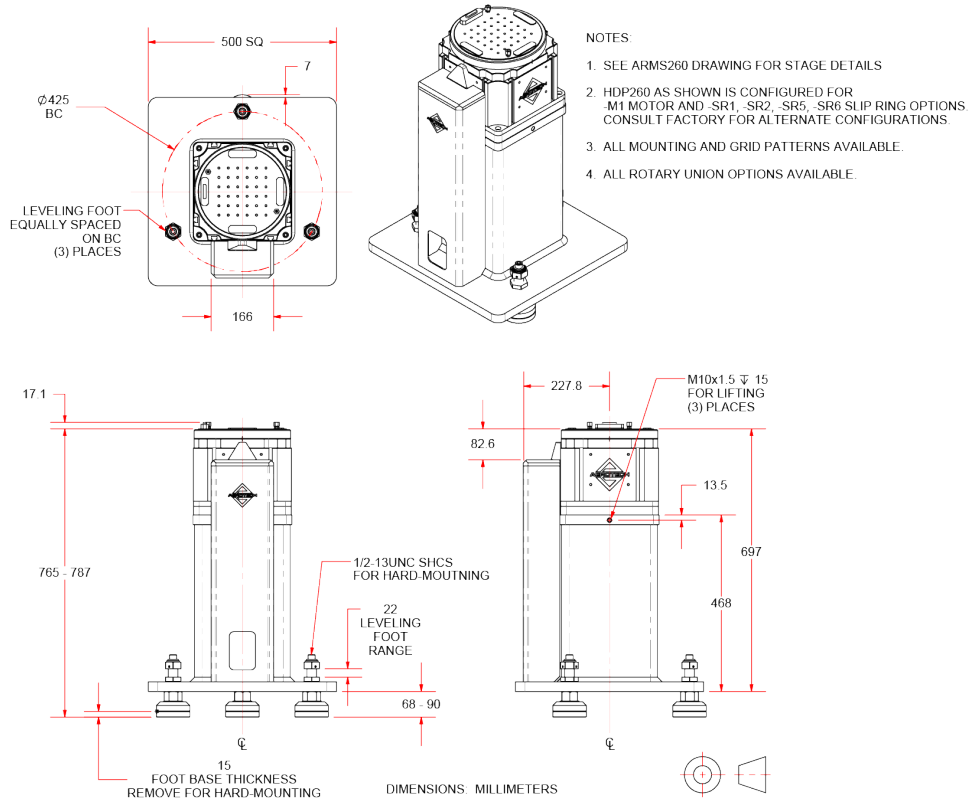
Mounting Pedestal Dimensions for the ARMS260 (-HDP)
